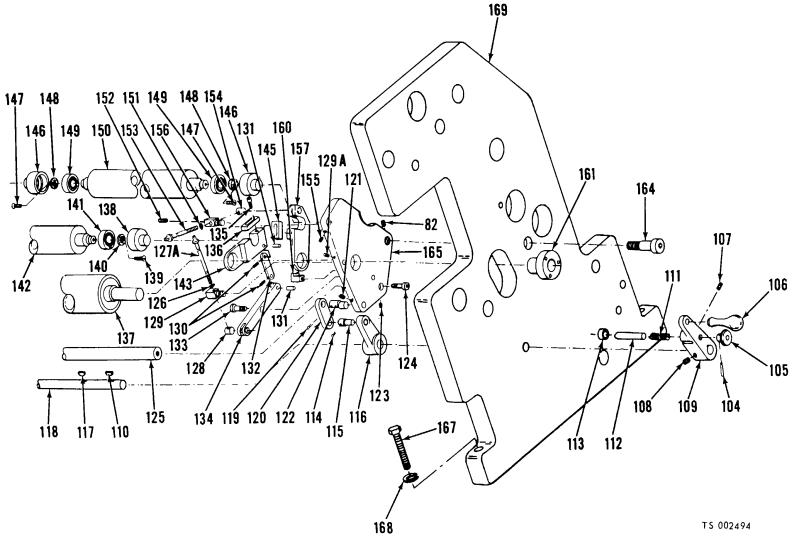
Water motion assembly (Sheet 5 of 6).
